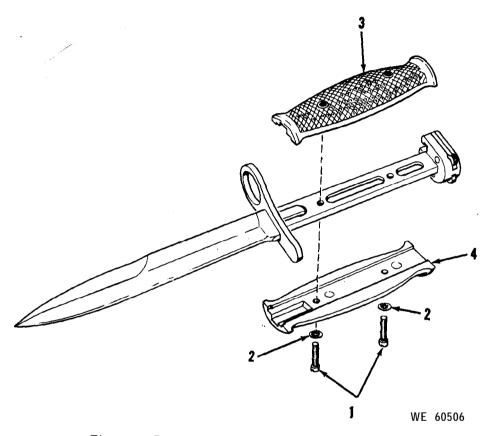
Bayonet-Knife MT-partial exploded view.
